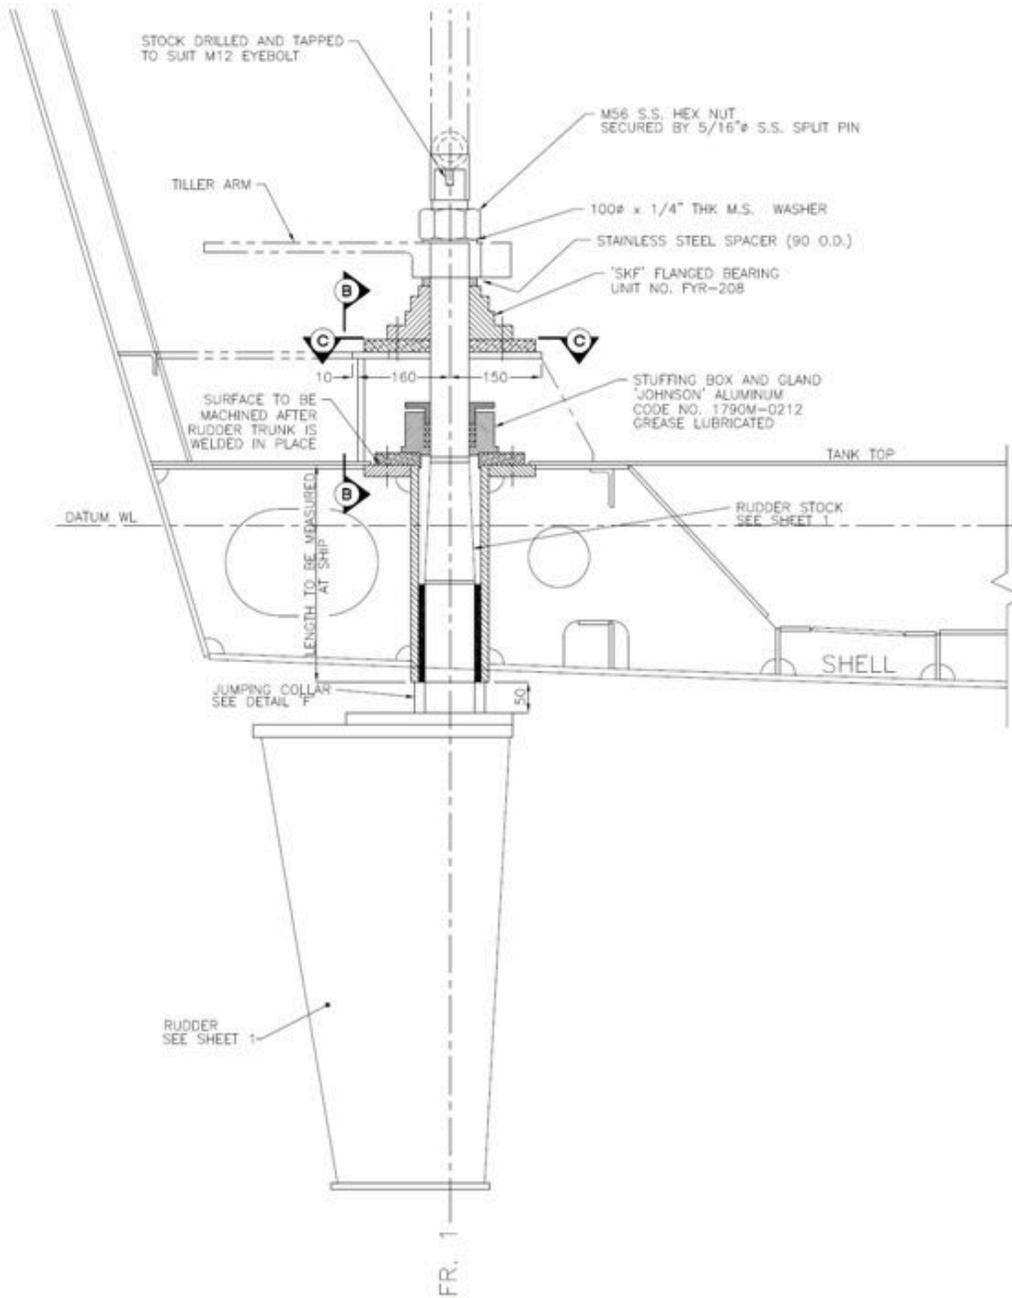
Fig. 3 – Rudder jumping collar flange drawing
